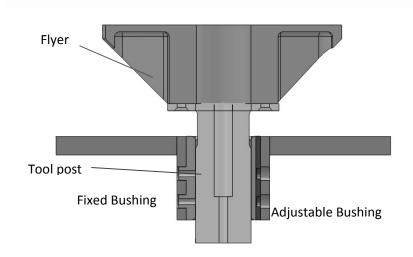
EM Press bushing, post and flyer assembly section view, with adjustable UHMW bushing on the right
